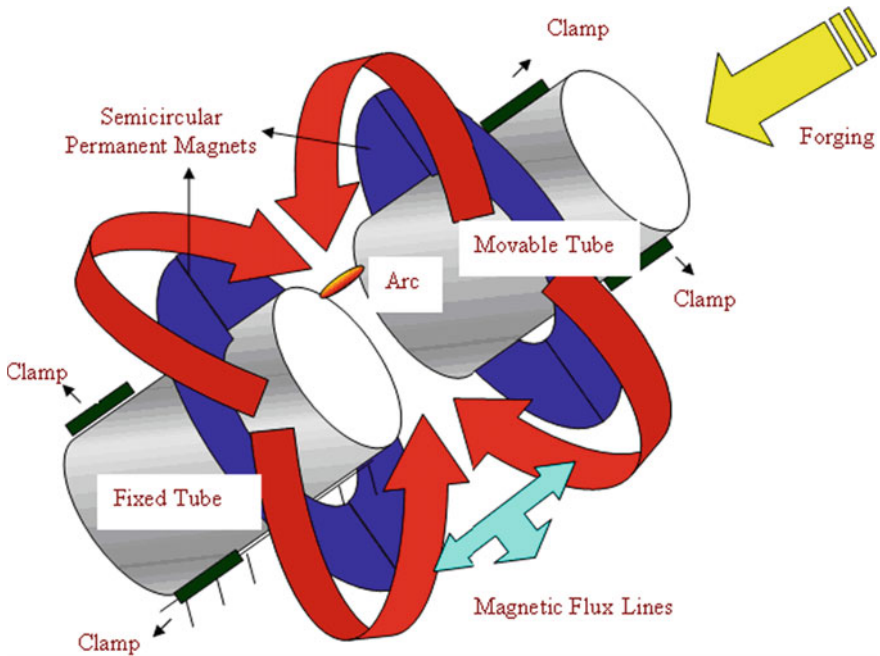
Basic representation of the MIAB welding process
